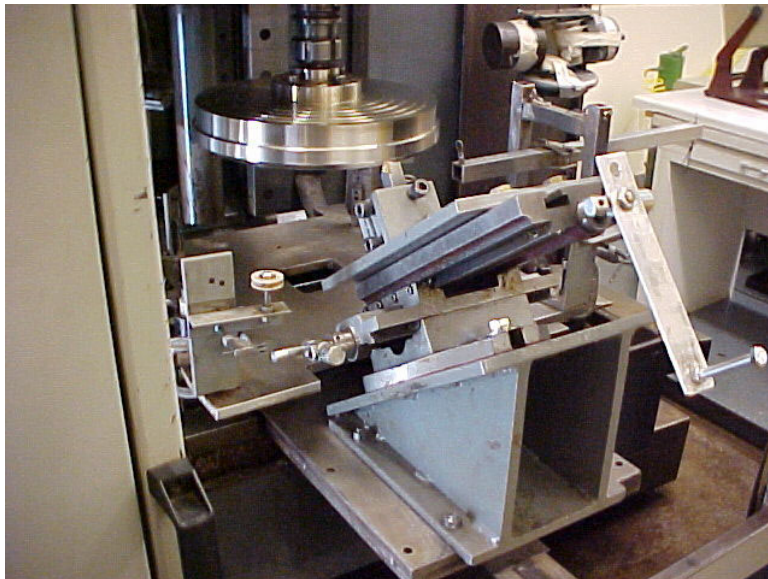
Another photograph of the fixture used for machining the bevel of the spindle
